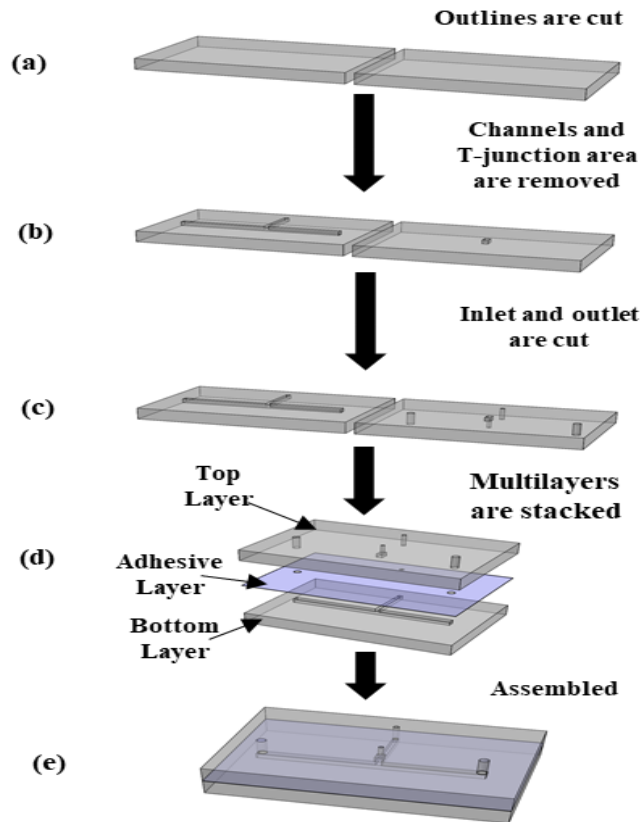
Fabrication process and assembly: (a) Laser cutting of the outline, (b) T-junction channels and pneumatic chamber are removed with laser machining, (c) inlet and outlet channels in the top layer are cut using a laser, (d) three layers, which will be assembled by stacking on top of another, and (e) the assembled model.
